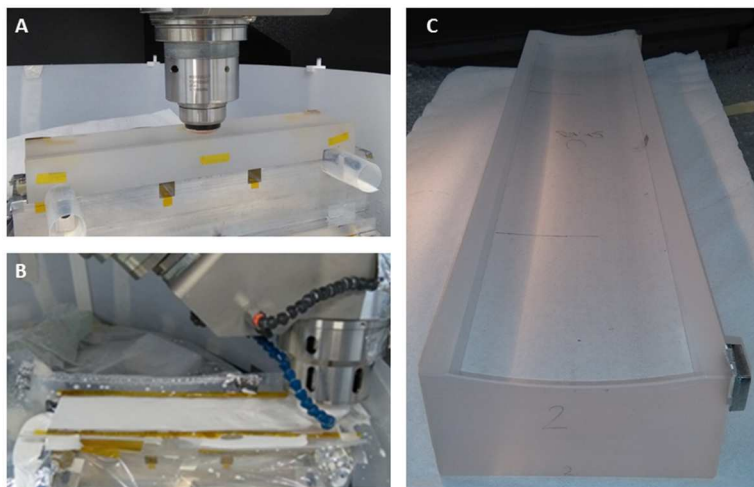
A. The parabolic mirror mounted on the IRP-1200 Zeeko machine. B. Running the bonnet polishing: the optical surface is underneath the recirculating abrasive slurry. C. The glossy optical surface after bonnet polishing. One of the three pads glued on the side of the workpiece is visible.
